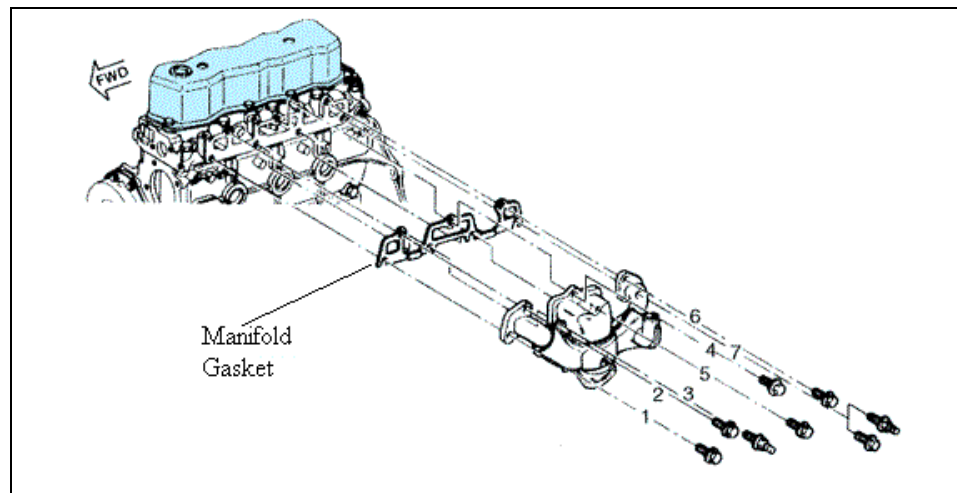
Exhaust Manifold And Gasket On An In-Line Engine (Fengli and Long, 2010).
